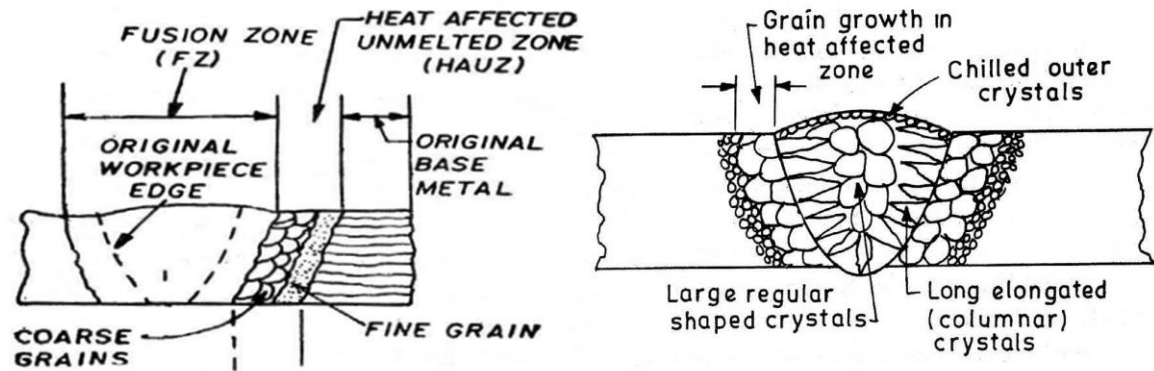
Structure of a) Fusion weld joint, b) Structure of Weld metal. Reproduced with permission from Ref. [99] Copyright (2001) Dhanpat Rai Publications
